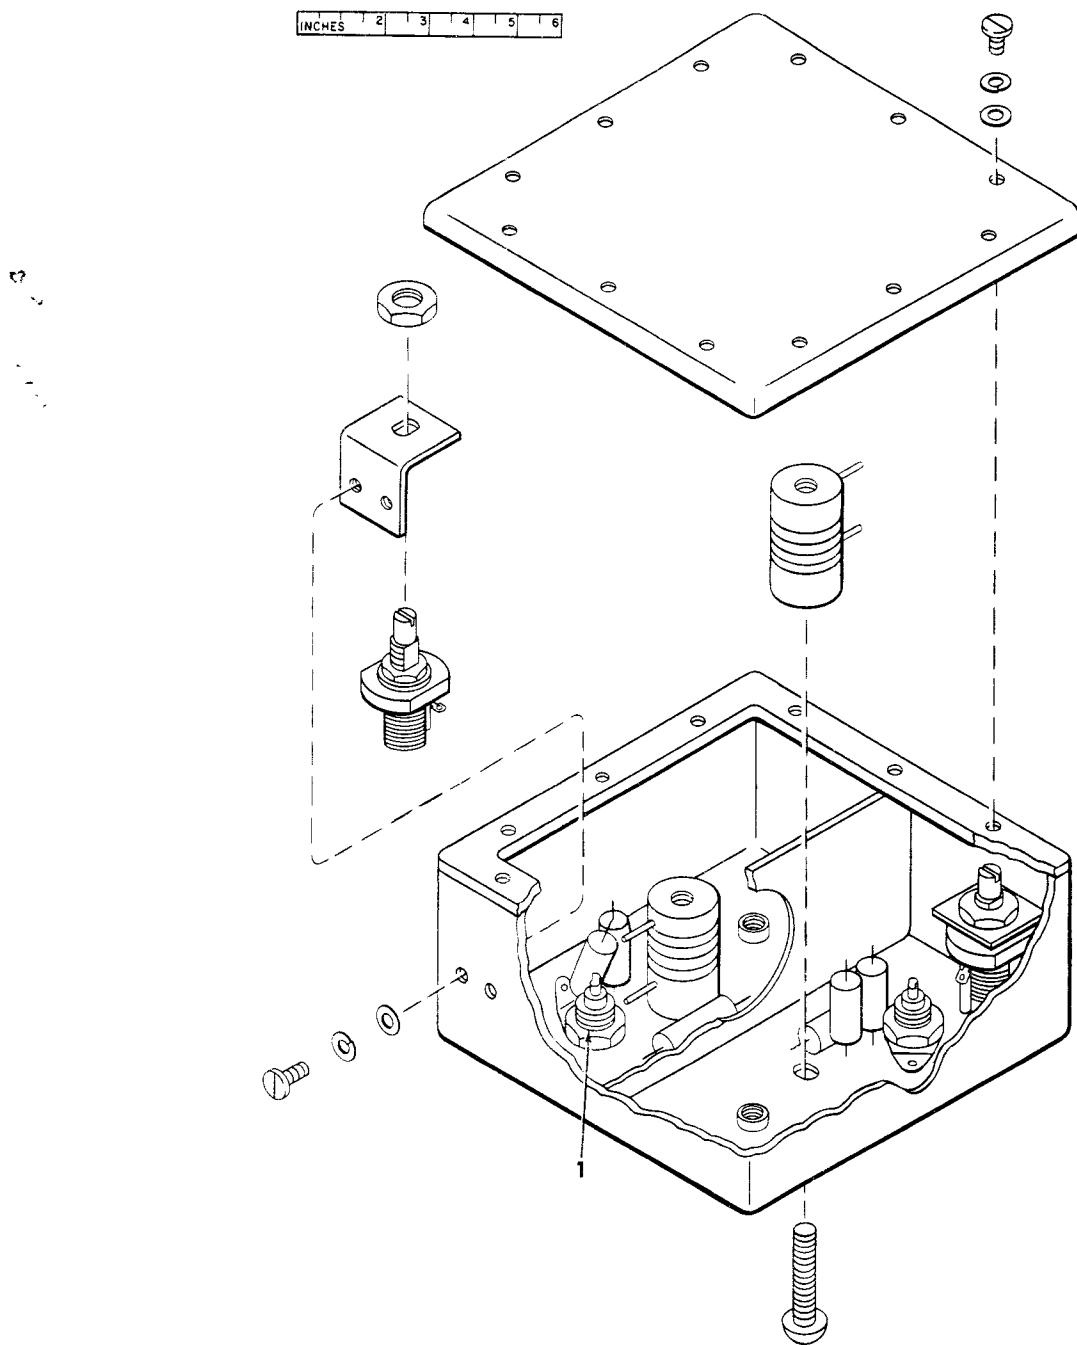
Switch, transmission line assembly (9011982)—exploded view
